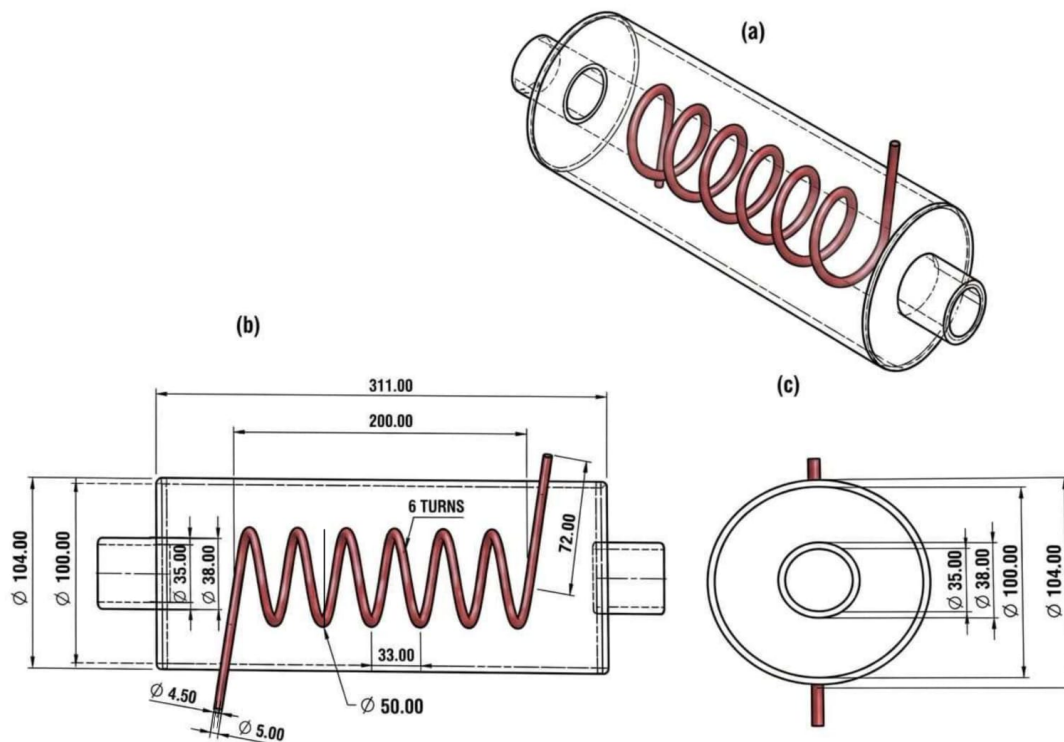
Shell-and-spiral coil heat exchanger design: (a) three-dimensional isometric view of the counter-flow configuration; (b) two-dimensional engineering drawing with key dimensions (shell: $\text{Ø}100$ mm ID x 311 mm length; spiral coil: $\text{Ø}50$ mm, 6 turns, tube $\text{Ø}4.5/5.0$ mm); and (c) front-end cross-sectional view
